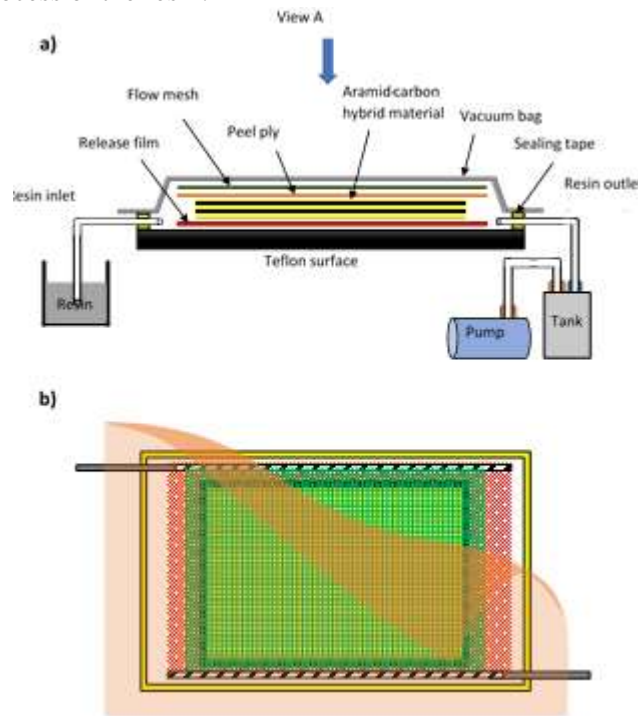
VARTM method demonstration (a) side view; (b) top view (view A)
